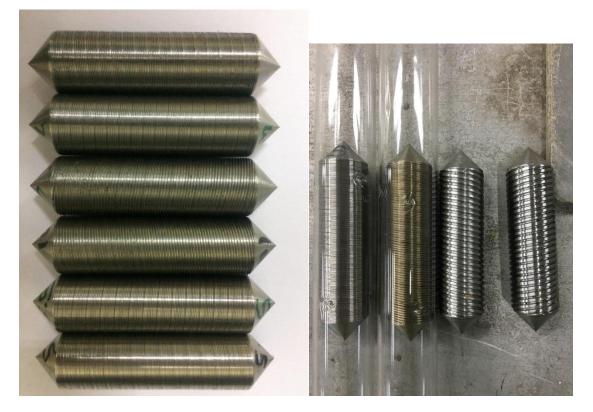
Different configurations of threaded cone-cone inserts of manufactured using conventional lathe machine
